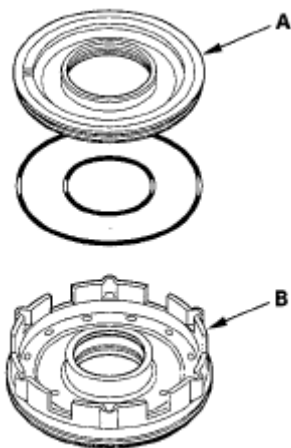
Identifying Clutch Piston And 1st Clutch Piston
